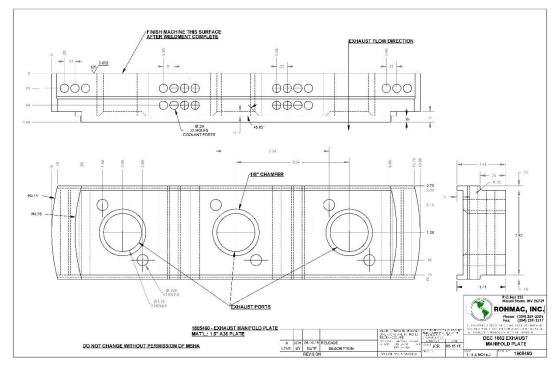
Revised Diesel Power Package Exhaust Manifold Plate Drawing
